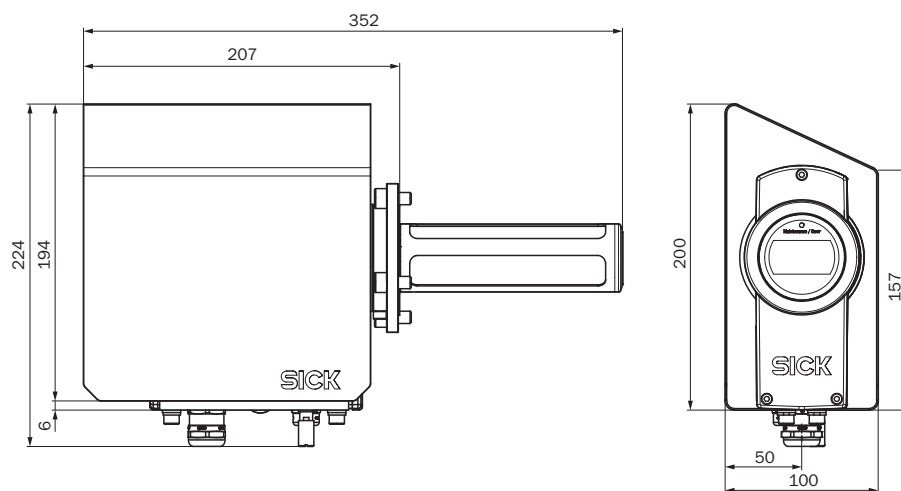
TRANSIC111LP weatherproof cover for flange fitting
